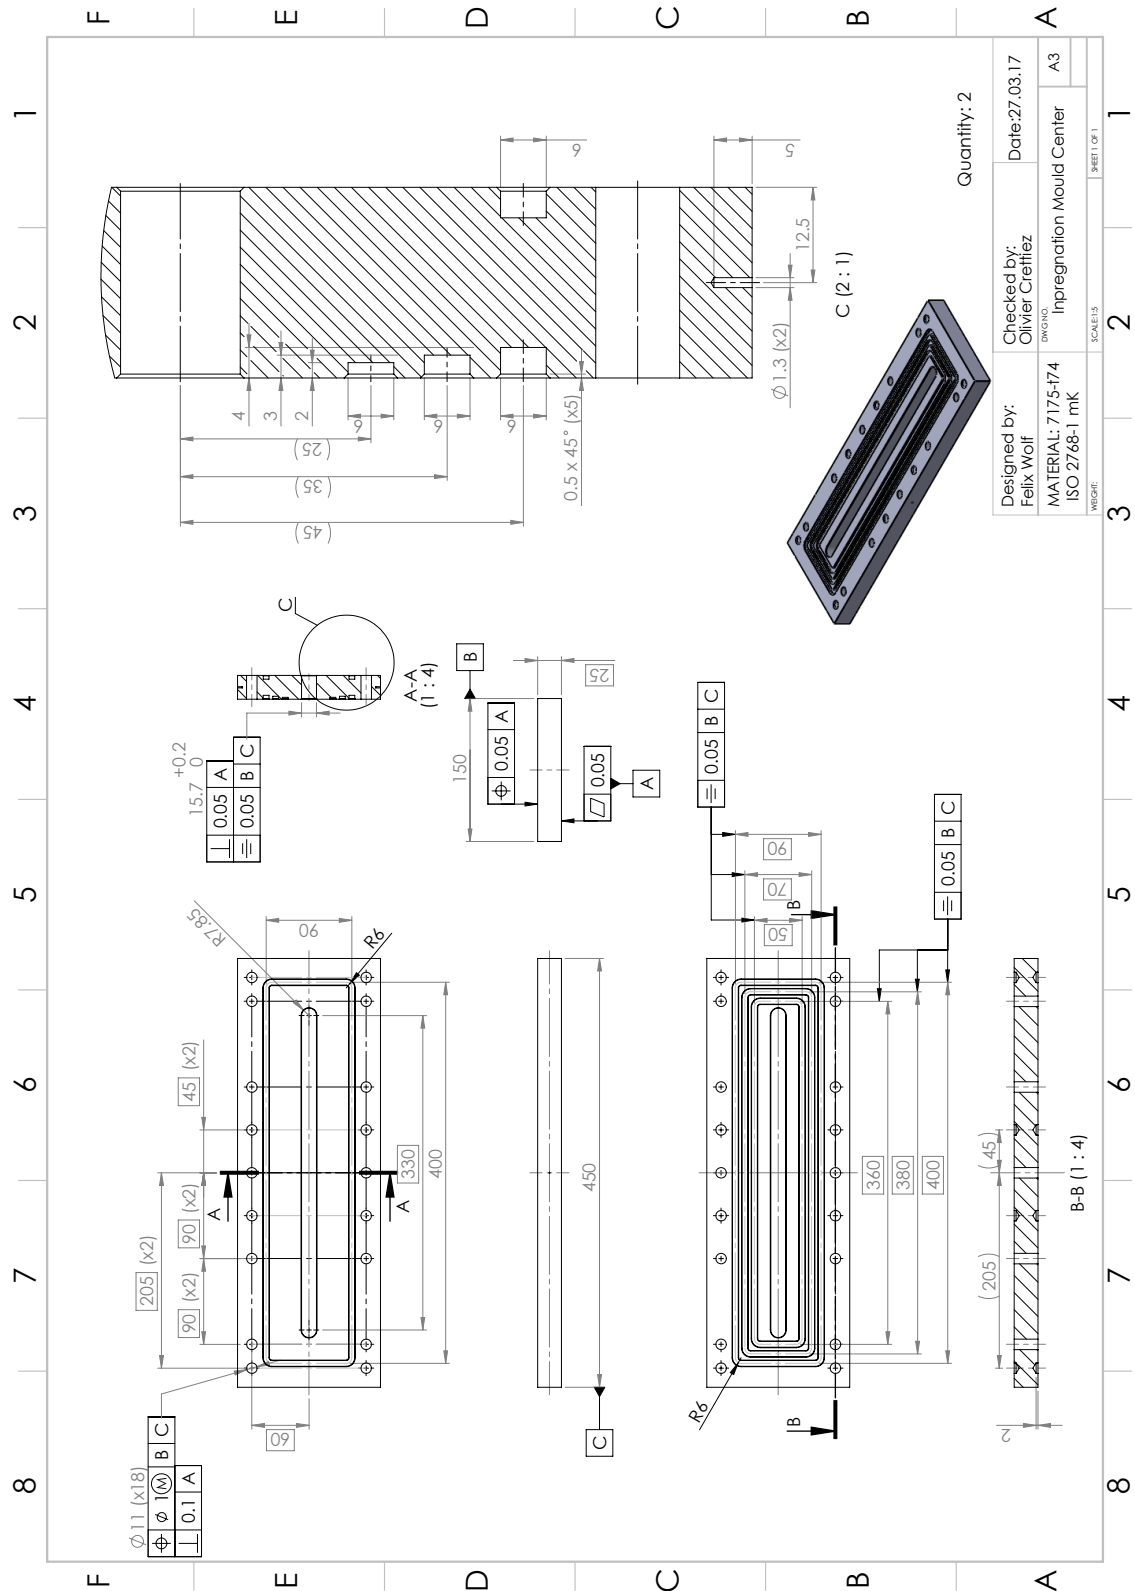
Manufacturing drawing of the centre part of the impregnation mould.
